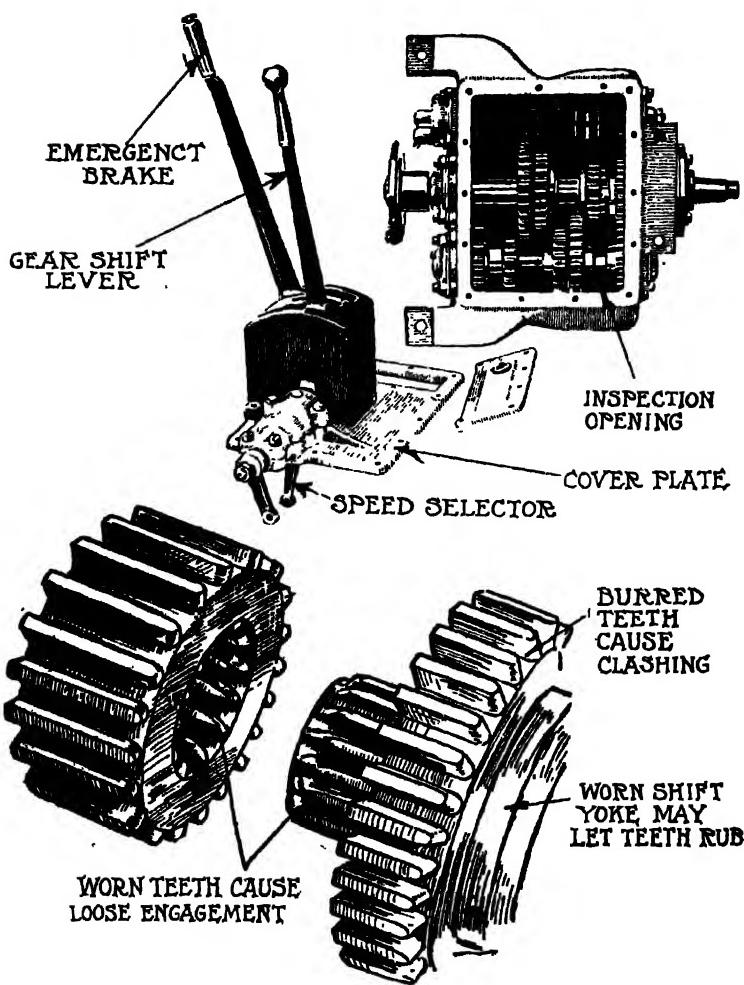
View of Jeffery Transmission with Cover Plate Removed at Top, Common Causes of Poor Gear Shifting Outlined in Lower Illustration.
